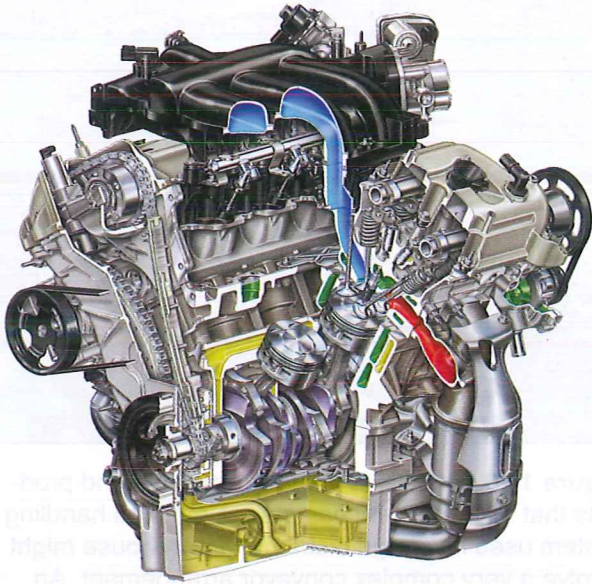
Technical illustrators present images of things that are more easily understood in pictorial views, such as the internal components of a four-cylinder, dual overhead cam automobile engine. (Ford)
